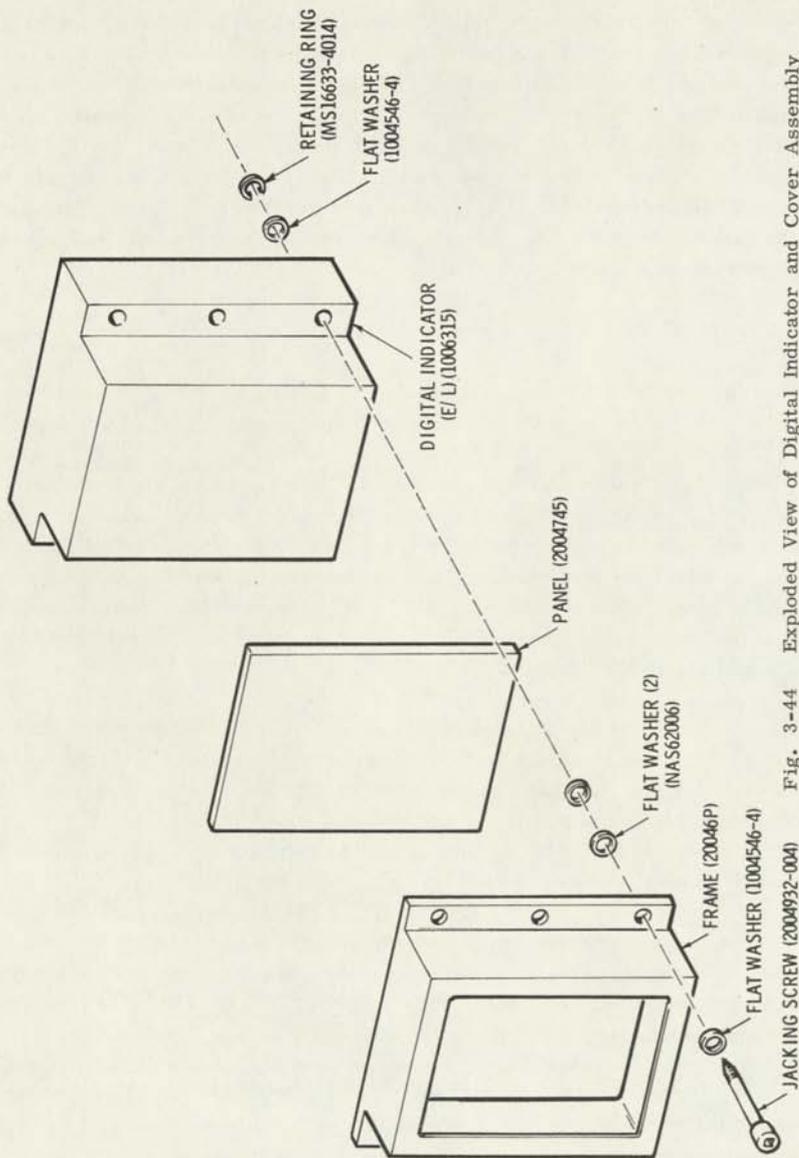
Exploded View of Digital Indicator and Cover Assembly
